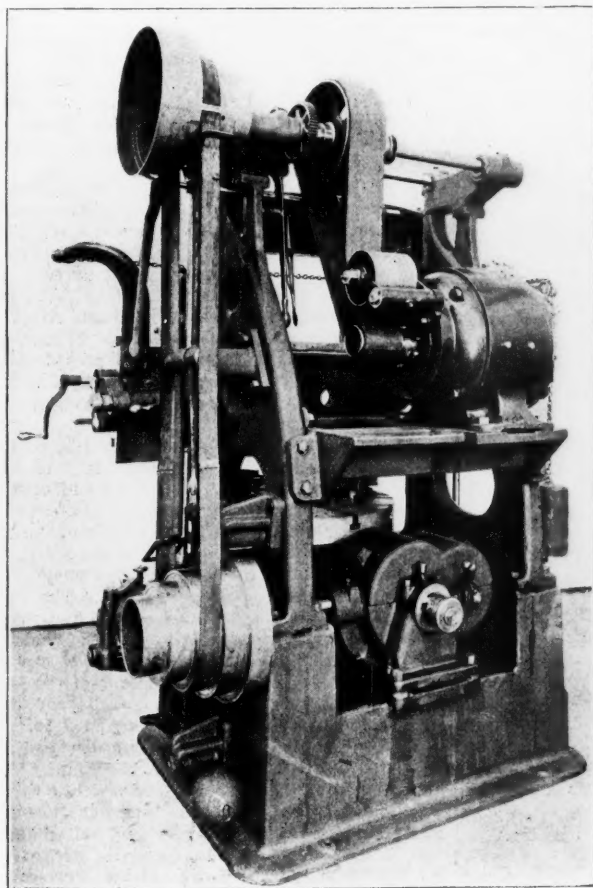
The Bullard Mill with Motor Mounted between Uprights.
